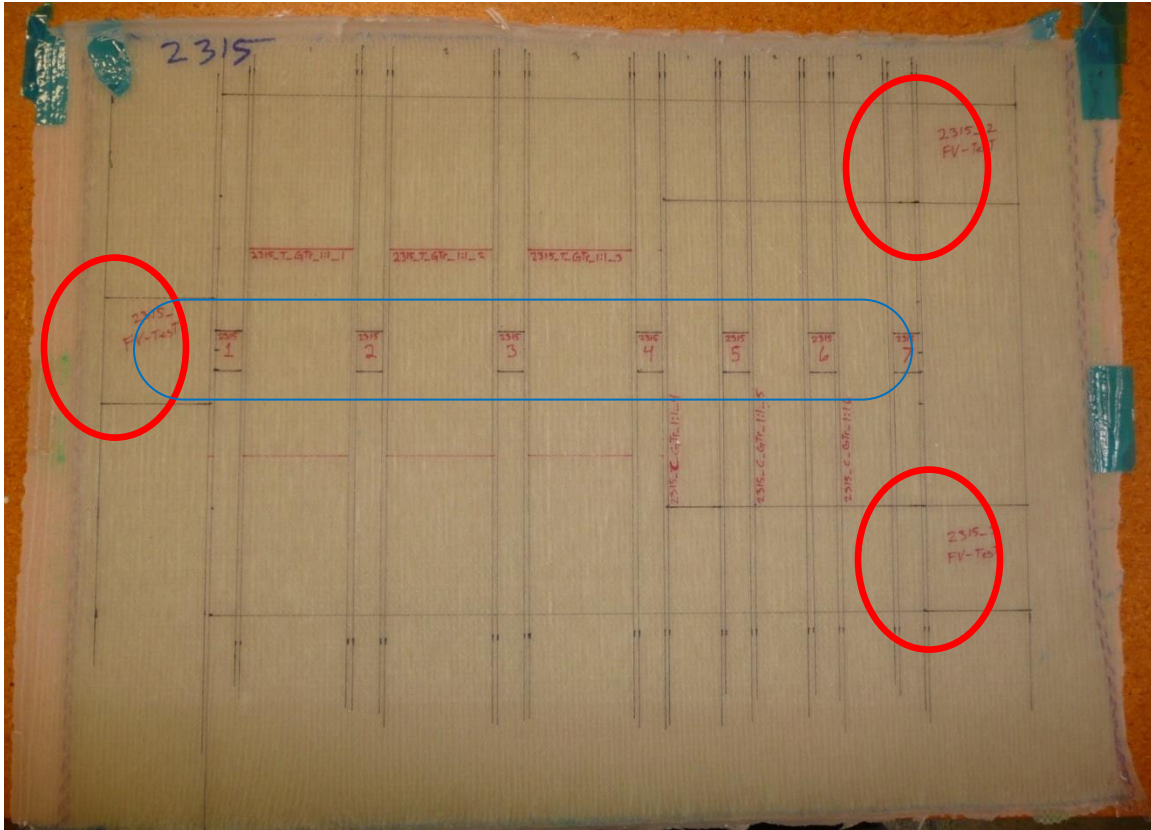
Laminate manufactured for Run # 1-- marked out for cutting out samples.
